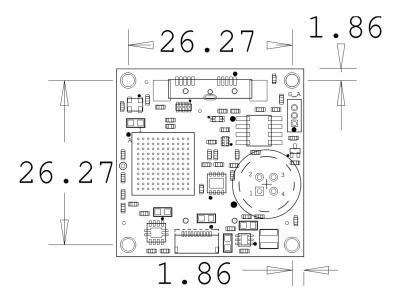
Rear Portion of See3CAM_CU40 Base Board mechanical dimensions
